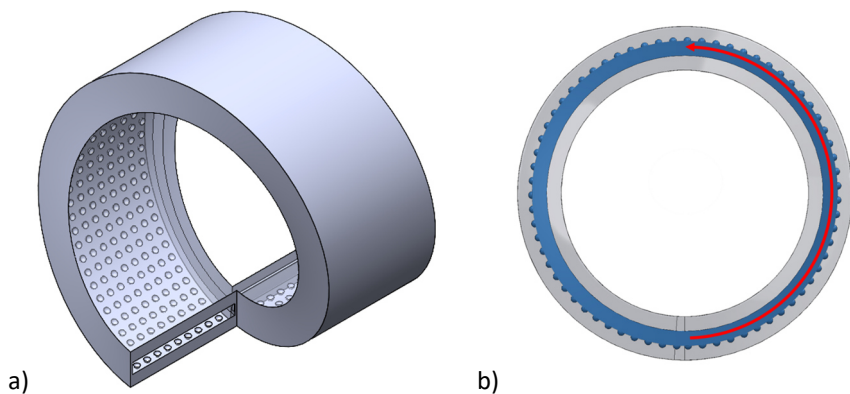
a) isometric view of a single cooling spiral turn with dimples and b) side view of spiral turn with flow direction.
